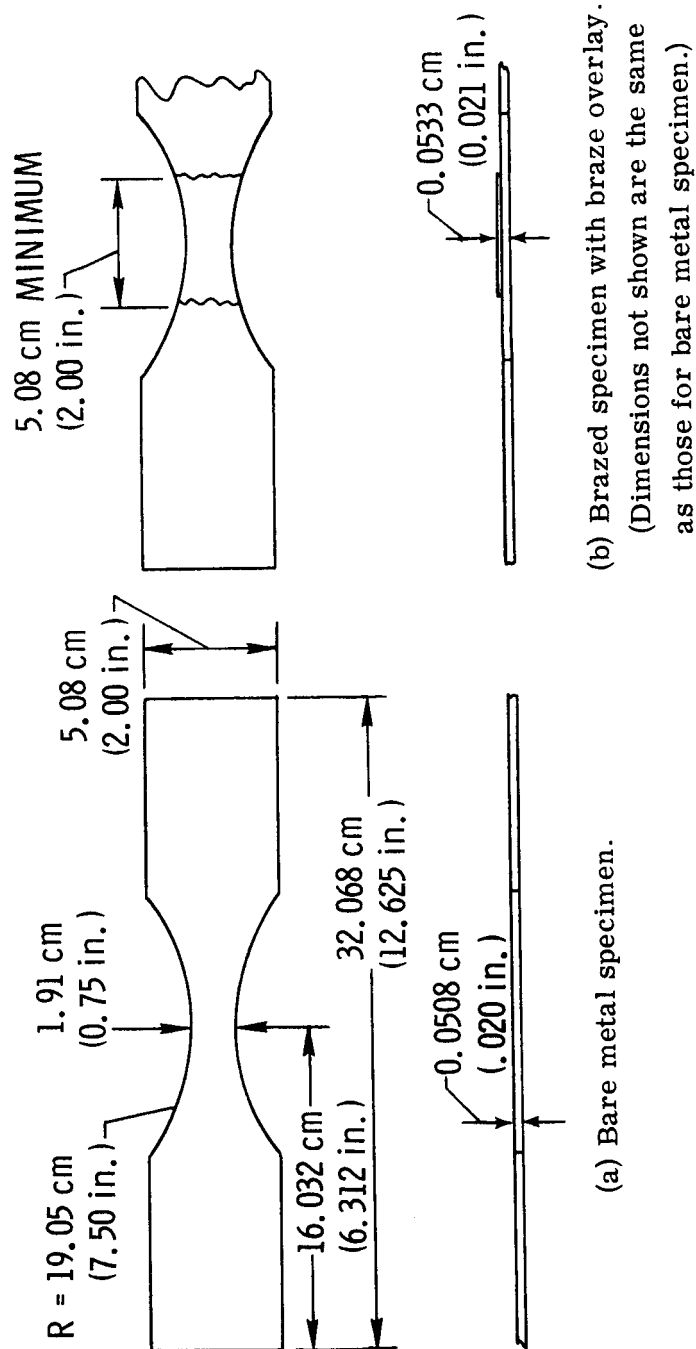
Fatigue-test specimen configurations. R denotes radius.
